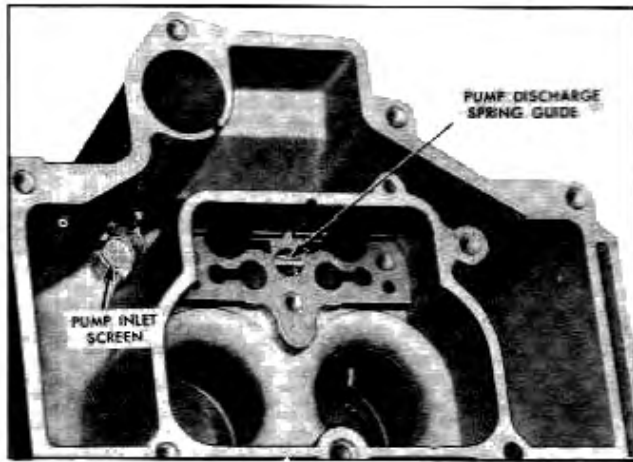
B-44 Pump Discharge Spring Guide and Pump Inlet Screen
